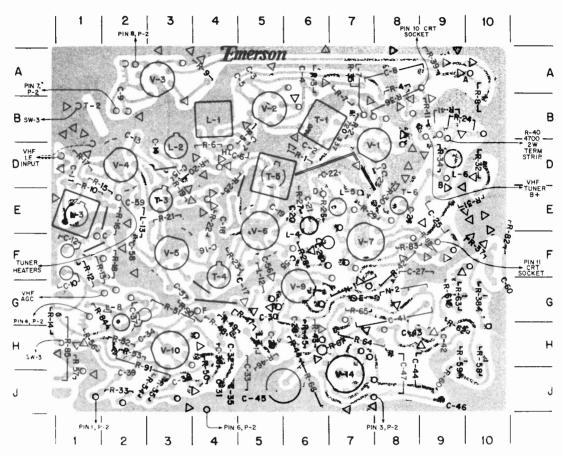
Etched Printed Circuit Board Chassis (Top View)
